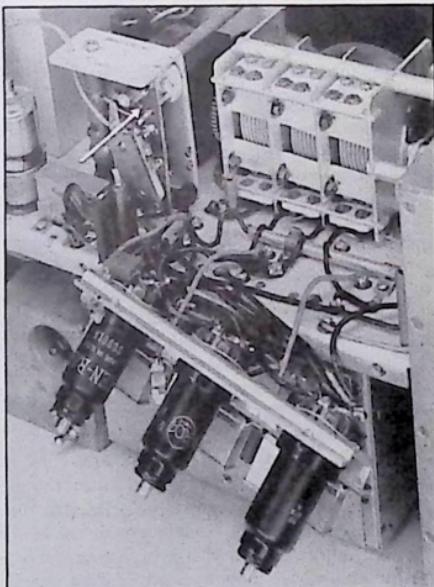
By taking out a few screws, the plate holding the r.f. tubes in the BC-342 can be pulled out, exposing the socket wiring. The parts in the crystal-filter unit also are more accessible when the r.f. tubes are out of the way. The arrow points to the stud mentioned in the text.
